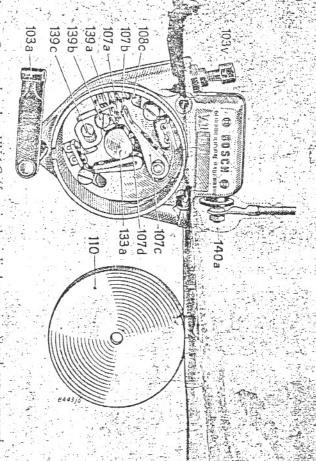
Contact breaker VU1C (for single cylinder engines), end cap remove
